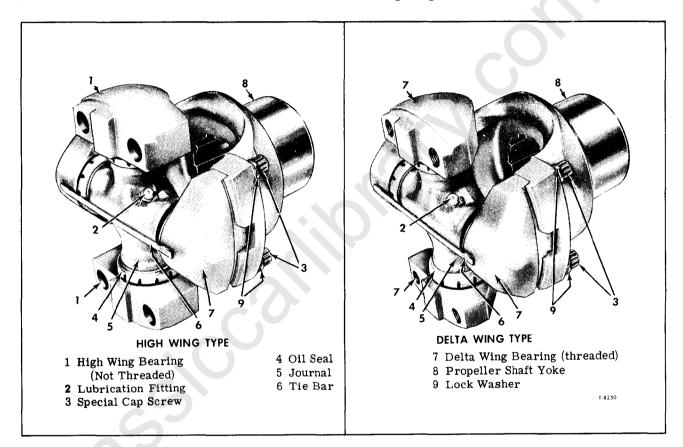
Type 58WB and 68WB Universal Joints Showing High and Delta Wing Bearings
